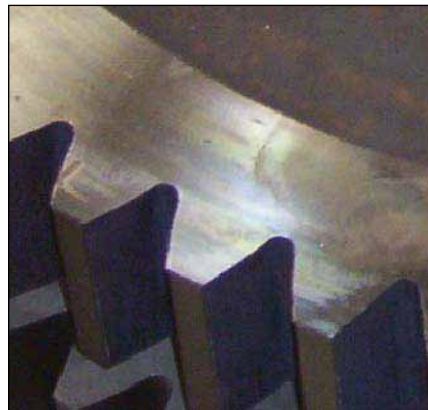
New 54 tooth, 1.5-pitch gear with close-up of teeth (courtesy ESI, Inc.).
